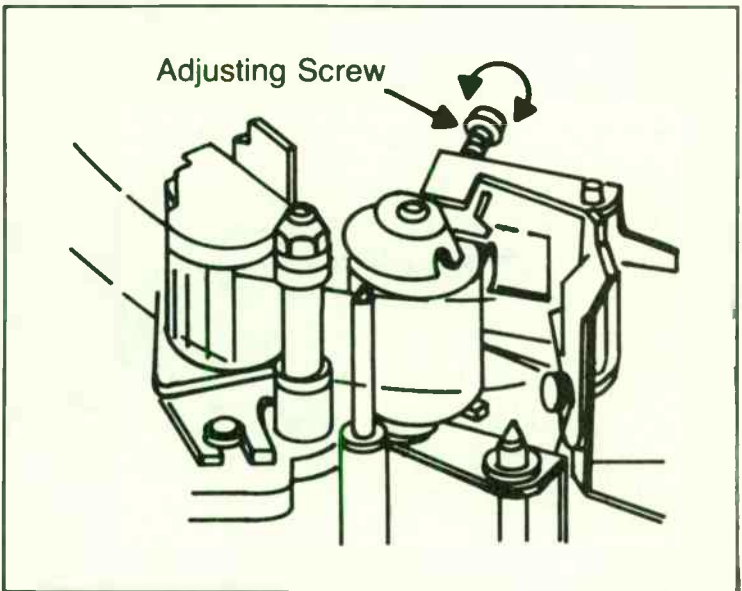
Pressure roller adjustment (courtesy of Magnavox).
